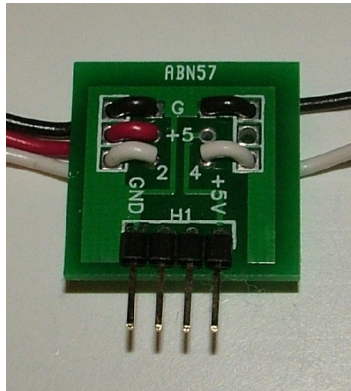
The terminator for a sensor array. The wires on the left and right sides connect to sensor PCBs. These will be added later.
